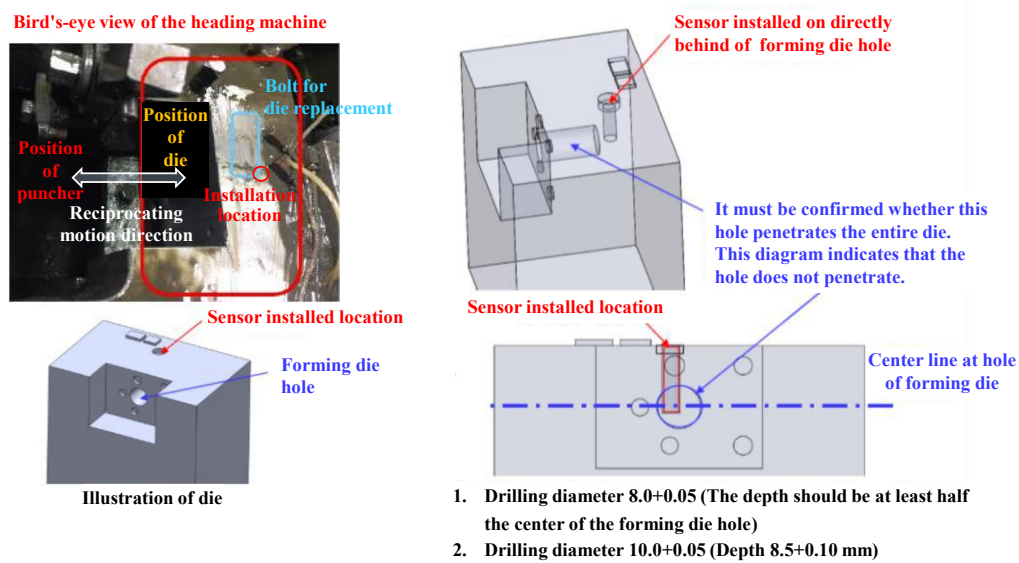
Installation Position Directly Behind the Forming Hole at the Mold End
